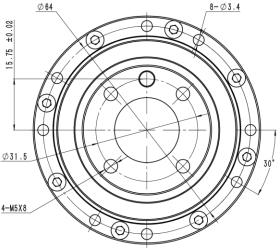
Diagram of wrist flange dimensions of AIR4-560A manipulator
